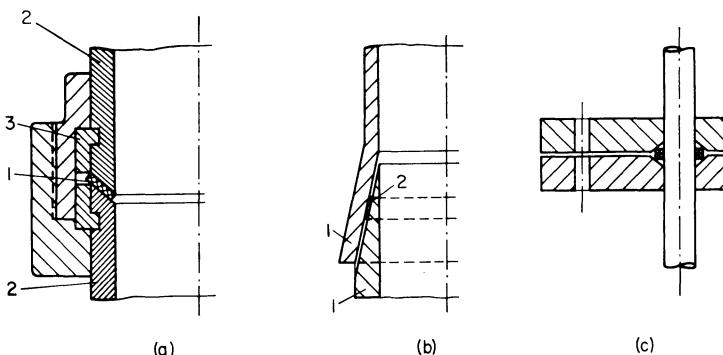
Conical gasket seals, with (a) flat gasket deformed to conical shape: (1) gasket; (2) tube; (3) split ring (after Goertz⁴⁵⁵); (b) rubber band (after Medicus⁸³⁹); (c) rectangular cross section gasket (after Cowie²⁴¹). (Courtesy of The American Institute of Physics)
